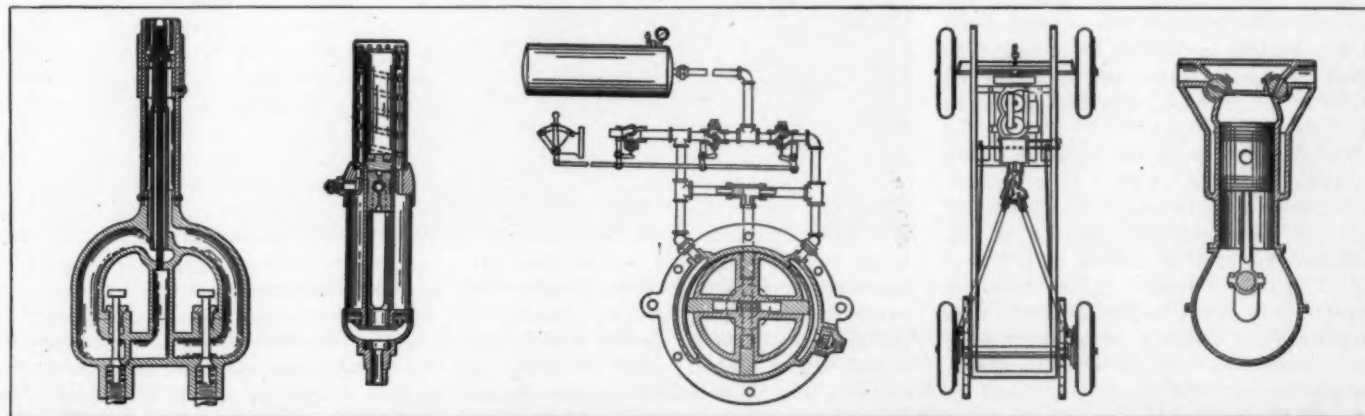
Weintz blow-torch. Fig. 2—Costello-Skinner air compressor. Fig. 3—Clarke cranking device. Fig. 4—Miggett drive. Fig. 5—Huff engine
